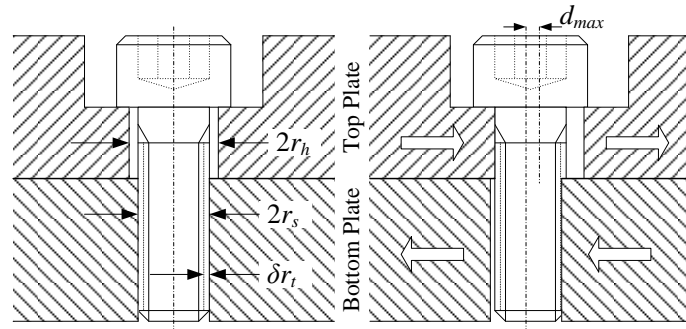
Perfect (left) and imprecise (right) fastening of fixture plates in an assembly.
